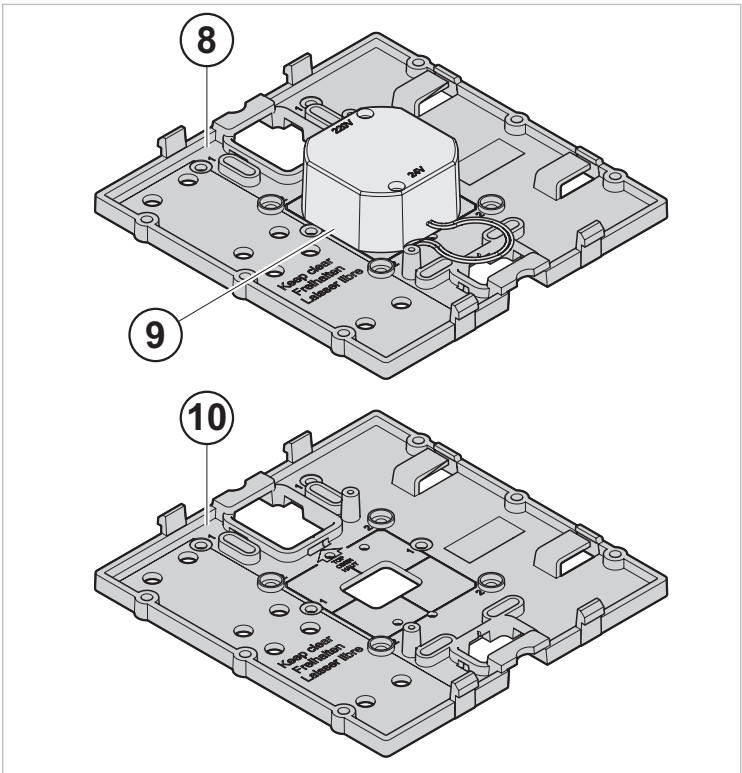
Universal mounting plate with or without 230 V / 24 V transformer
